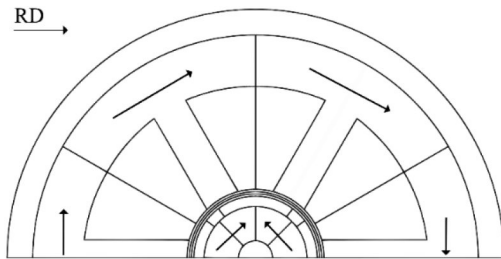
Segmented machine design; the arrows indicate the easy axis of the steel sheets/segments
